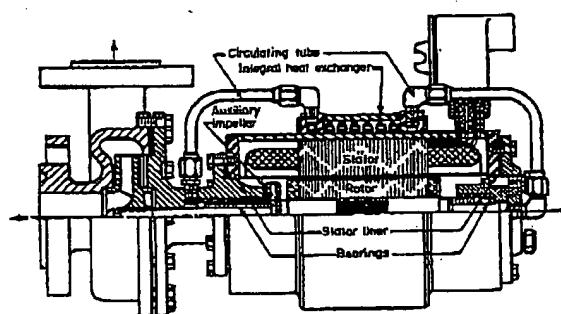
Canned-motor pump. (Courtesy of Chempump Division, Crane Co.)
